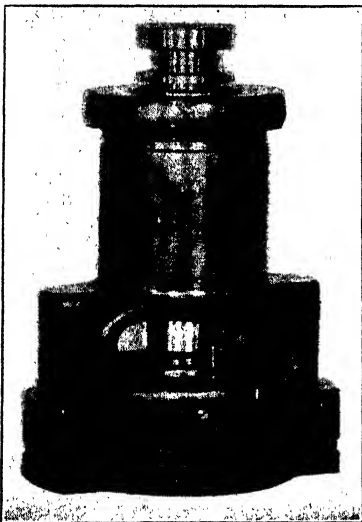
Sub-press die for watch parts and similar small clearance work on thin metal.
